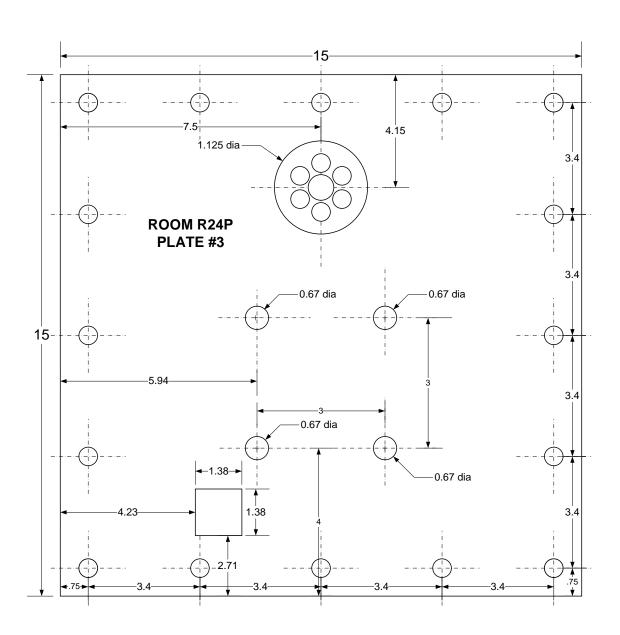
Room 24S (Test Room) Waveguide Plate w/ Dimensions Plate #3
